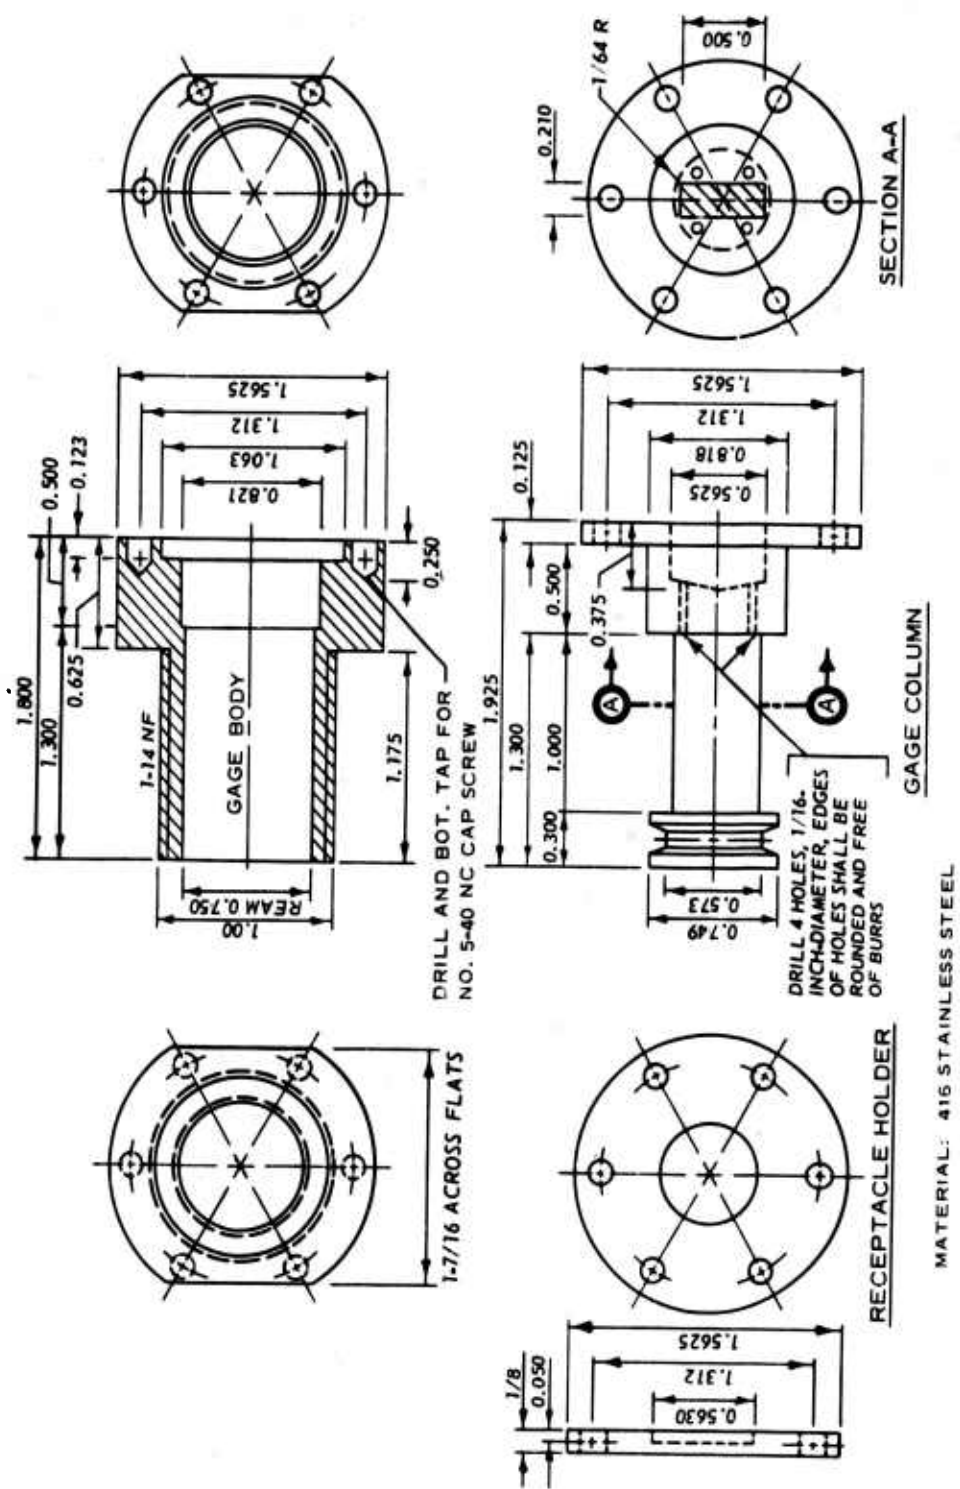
Drawing of M-1 gage. Dimensions are in inches.
